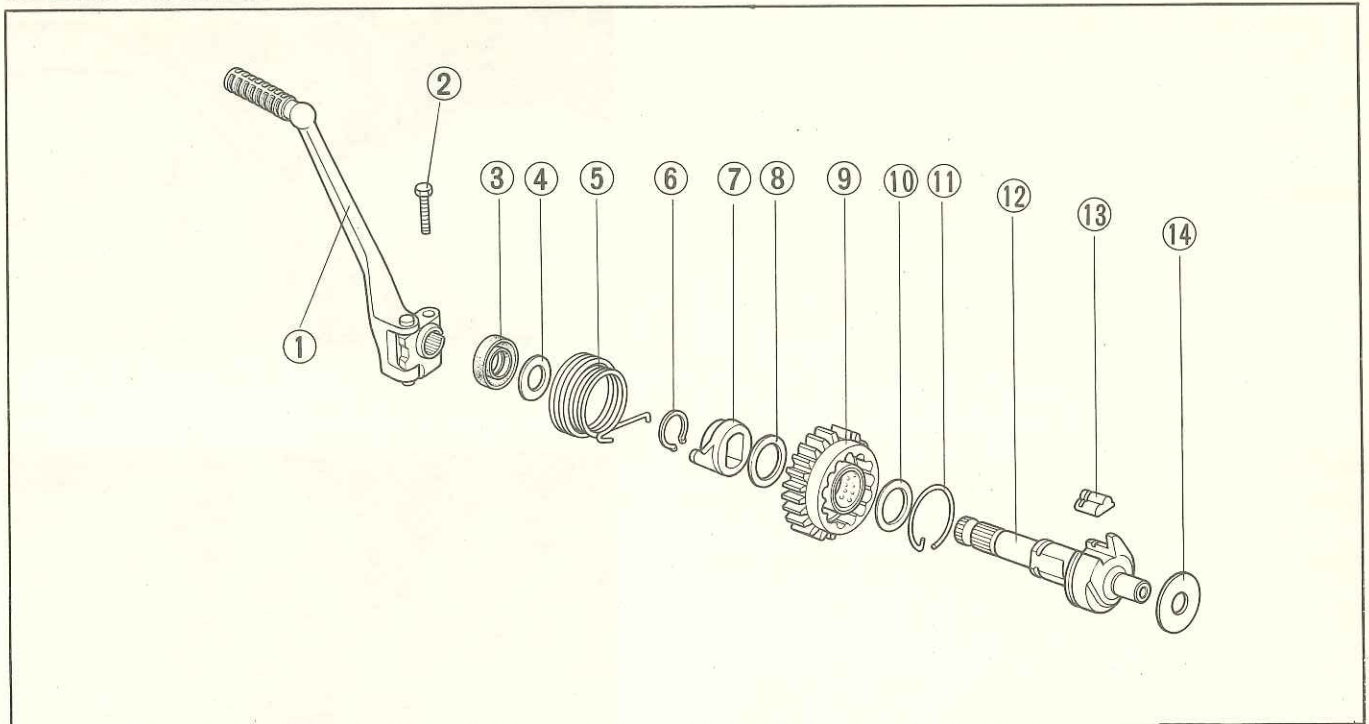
(1) Kick starter arm (2) 8x25 bolt (hex.) (3) 18x29x7 Oil seal (4) 17 mm washer (5) Kick starter spring (6) 22 mm external circlip (7) Kick starter spring retainer (8) 22 mm thrust washer (9) Starter pinion (24 teeth) (10) 22 mm thrust washer (11) Starter pawl spring (12) Kick starter spindle (13) Kick starter pawl (14) 16 mm washer
